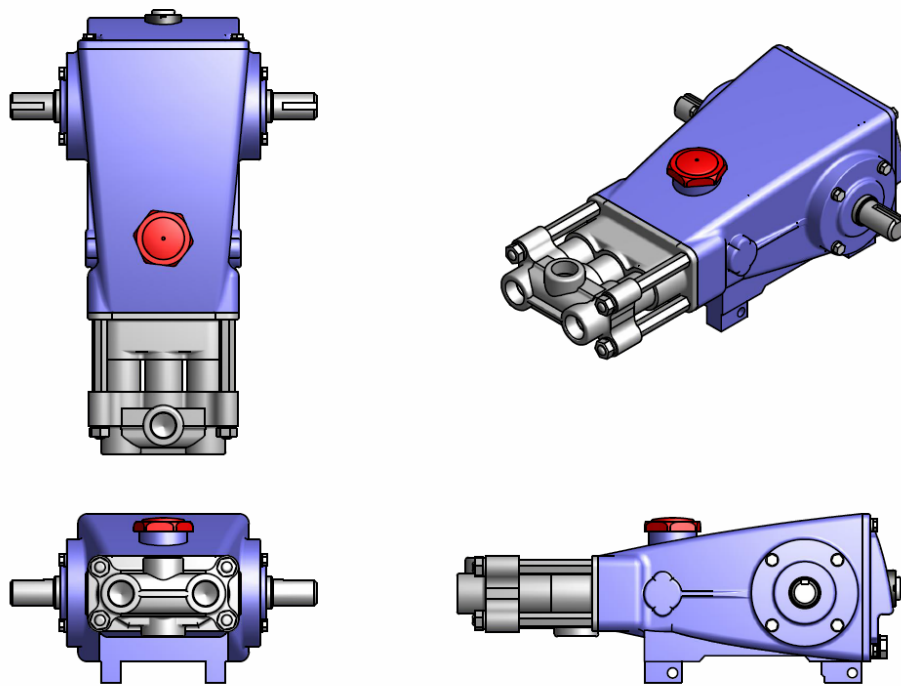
Model drawing of a triplex single-acting piston pump [35].
